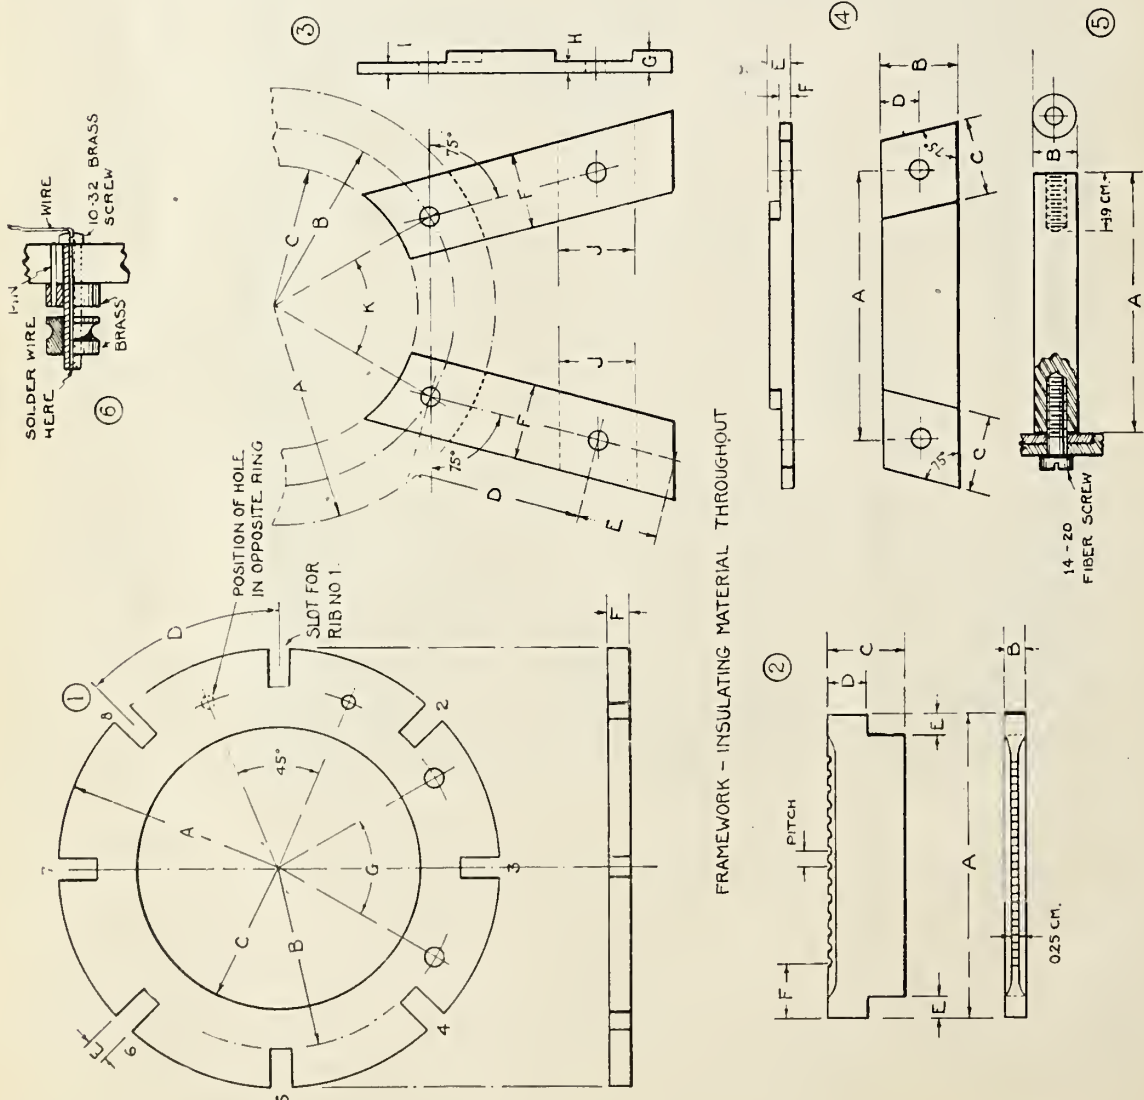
WORKING DIMENSIONS FOR PARTS OF INDUCTANCE COIL FRAMEWORKS.
